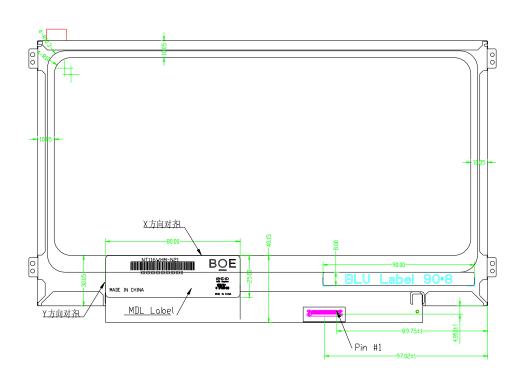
TFT-LCD Module Outline Dimensions (Rear view)
